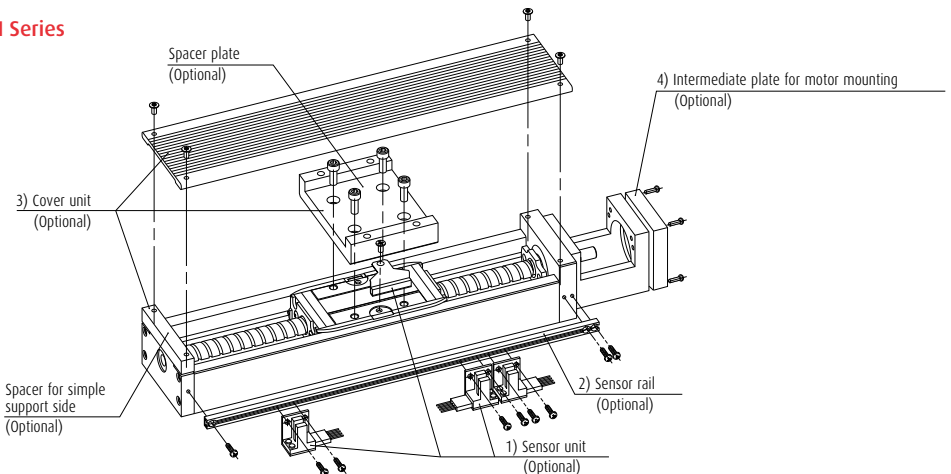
Assembly: Accessories for MCH10 (example)
